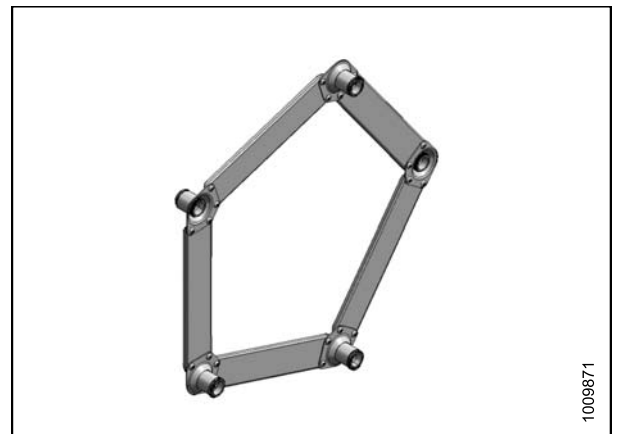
Five-Bat Reinforcing Kit Shown – Six-Bat Reinforcing Kit Similar
